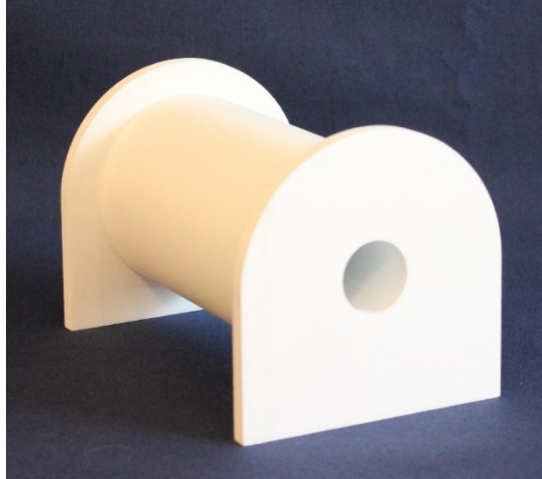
SISO - Nozzle - Prototype - Forward View
